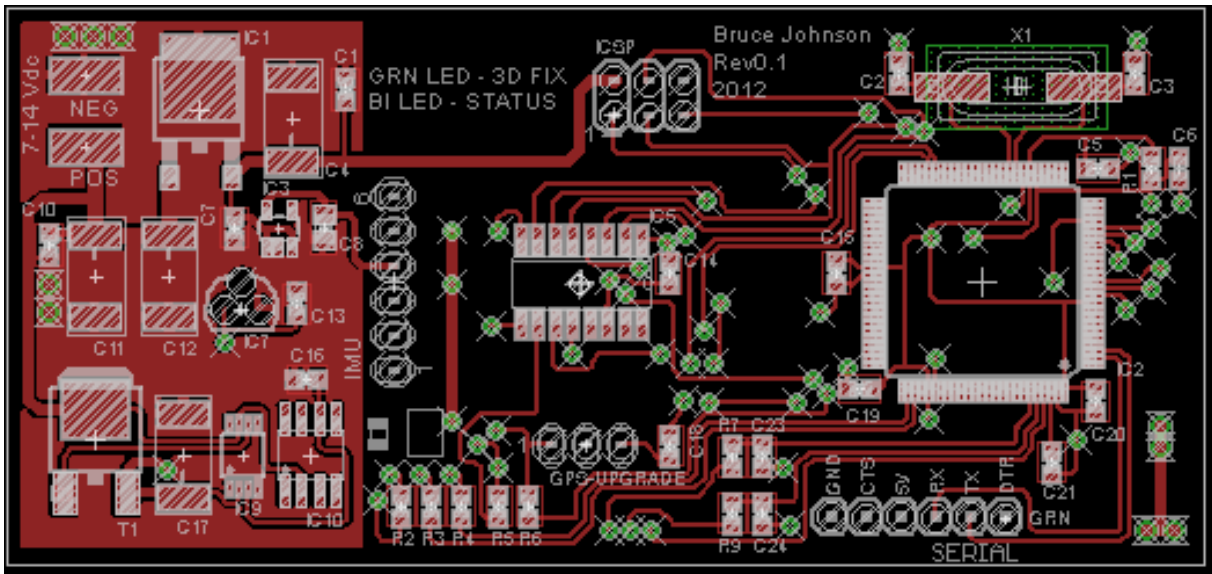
Completely integrated logger printed circuit board layout - Top view
